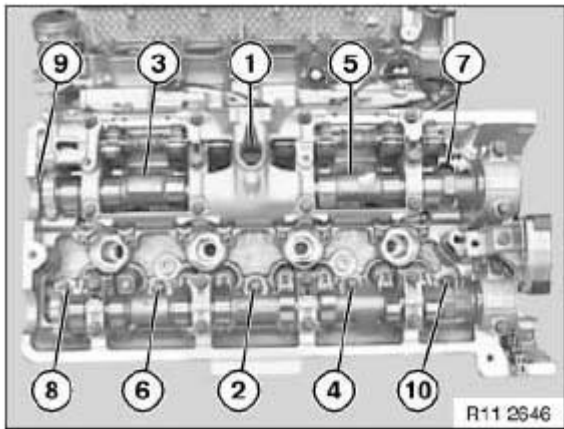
Releasing Cylinder-Head Bolts In Reverse Order
